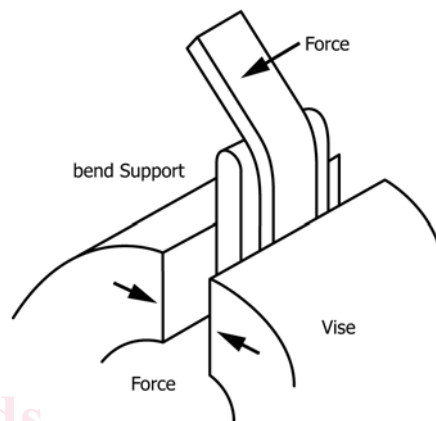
Schematic Fixture for Arrangement B, Thin-material Semi-guided Bend Test
